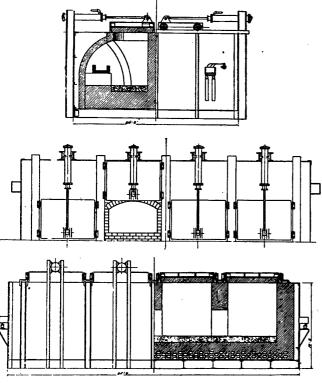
Pit Type Furnace for Soaking Ingots for Heavy Forgings and Shafts.
